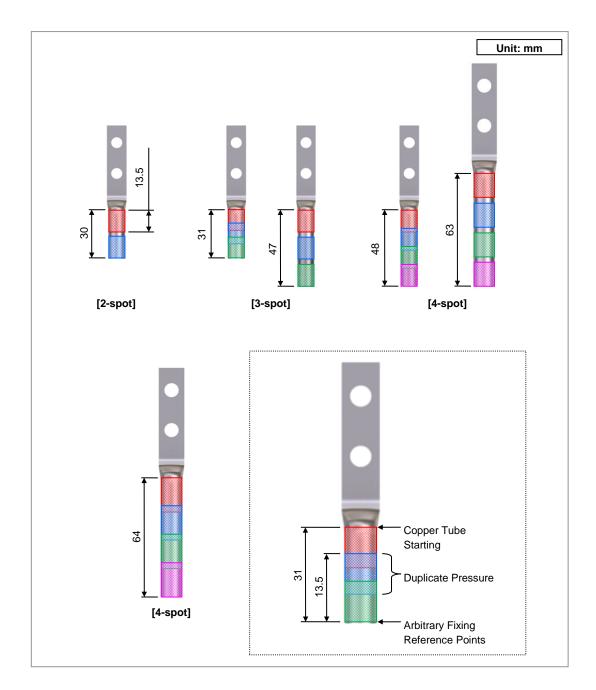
Pressure Reference Drawing (Hydraulic Compressor)
